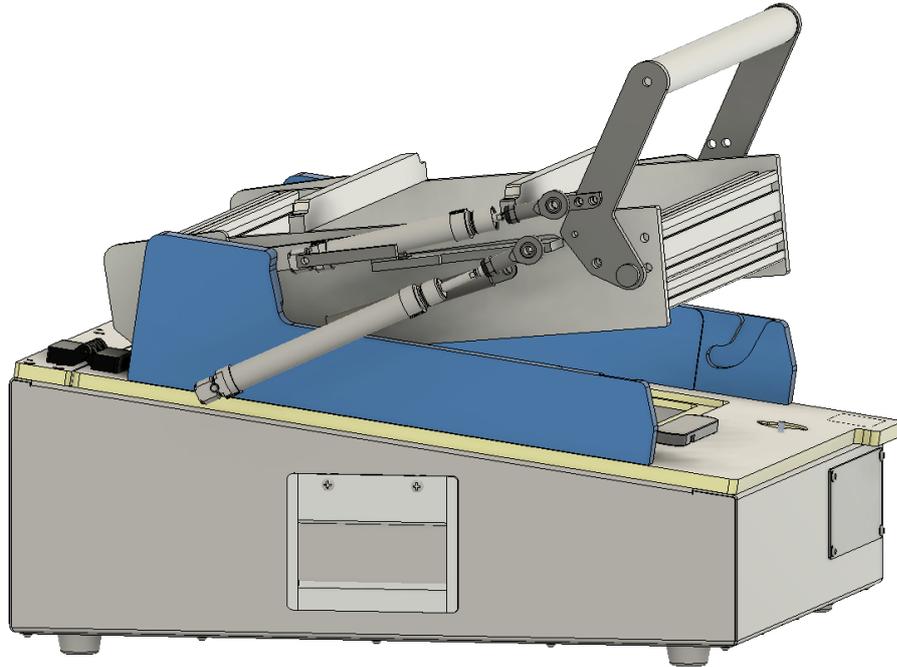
Illustration of how pneumatic cylinders could be fastened to automatically open and close the FCT-fixture.
